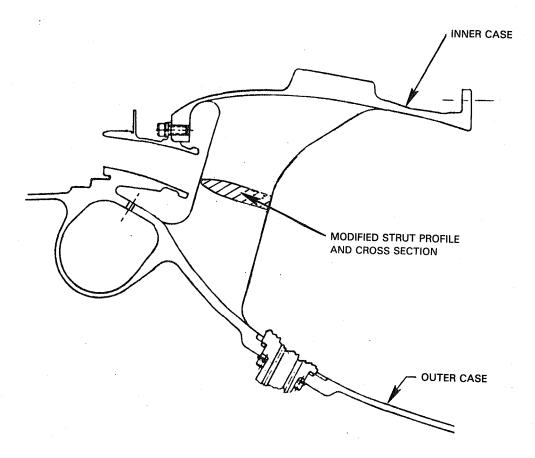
Energy Efficient Engine Combustor Component Diffuser Section Showing Modified Strut Design
